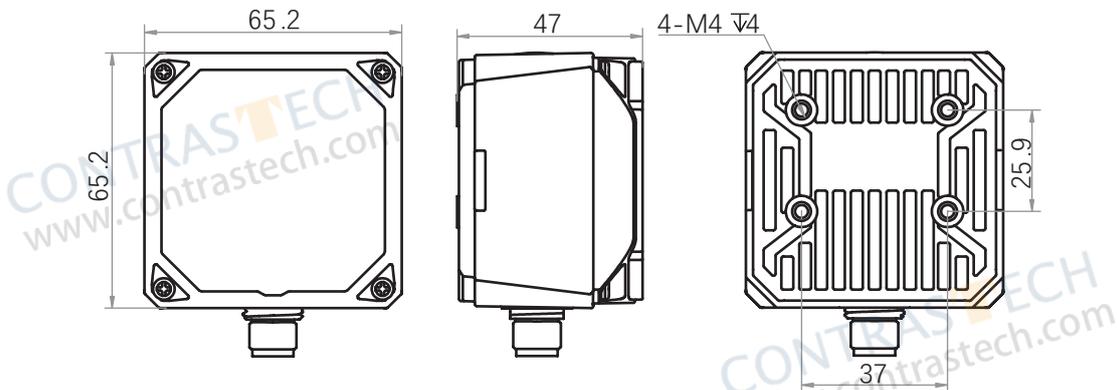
Mechanical Dimensions (in mm) of the Six-way light source code reader with 65.2 * 65.2 * 47 mm housing (Built-in 14 LED lamps).
